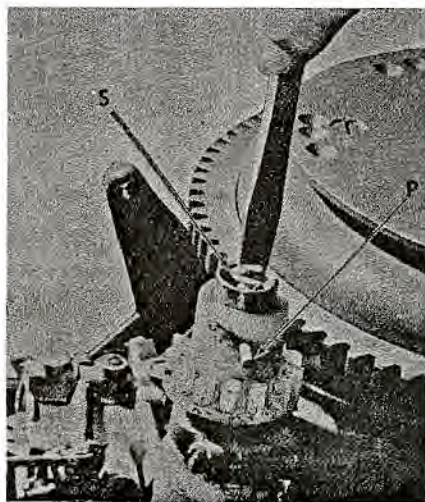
To disassemble the starter, first remove lock screw (S) and install special tool before attempting to remove drive pin (P). Refer to text.
